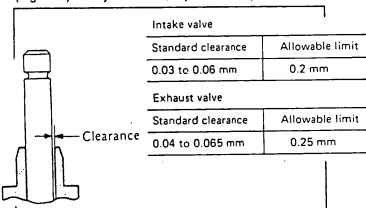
Valve to Valve Guide Clearance VALVE SEAT:
